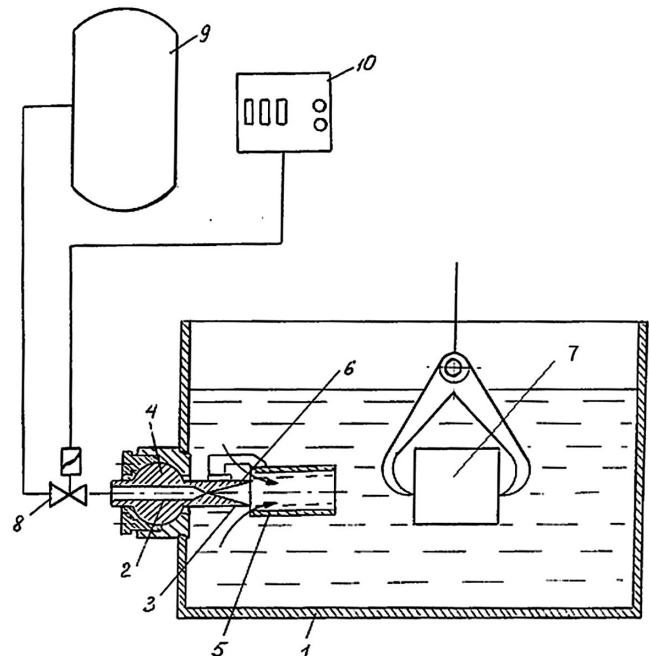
Special tank for discrete-impulse energy input used for intensive quenching of steel parts [21,22]: 1, quench tank; 2 and 3, Laval nozzles; 4, rotation device; 5, cylindrical tube; 6, taped tube; 7, steel part; 8, valve; 9, compressed air storage tank; 10, computer controller.
